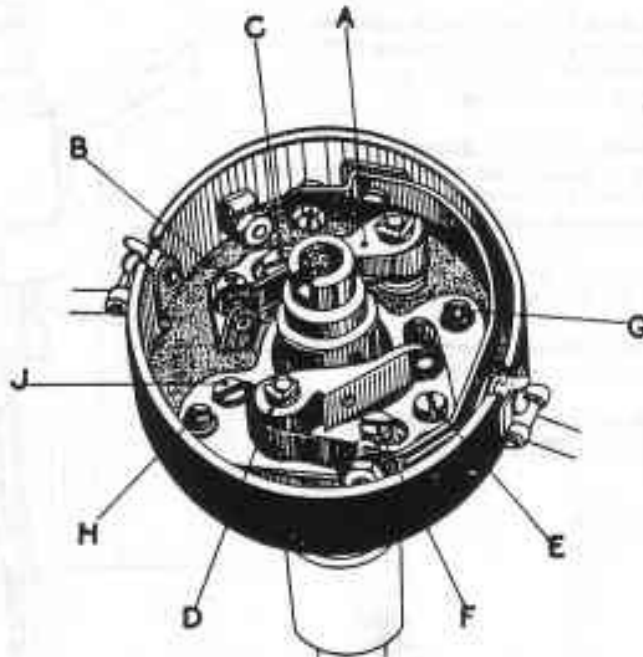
DISTRIBUTOR CONTACT BREAKERS.
